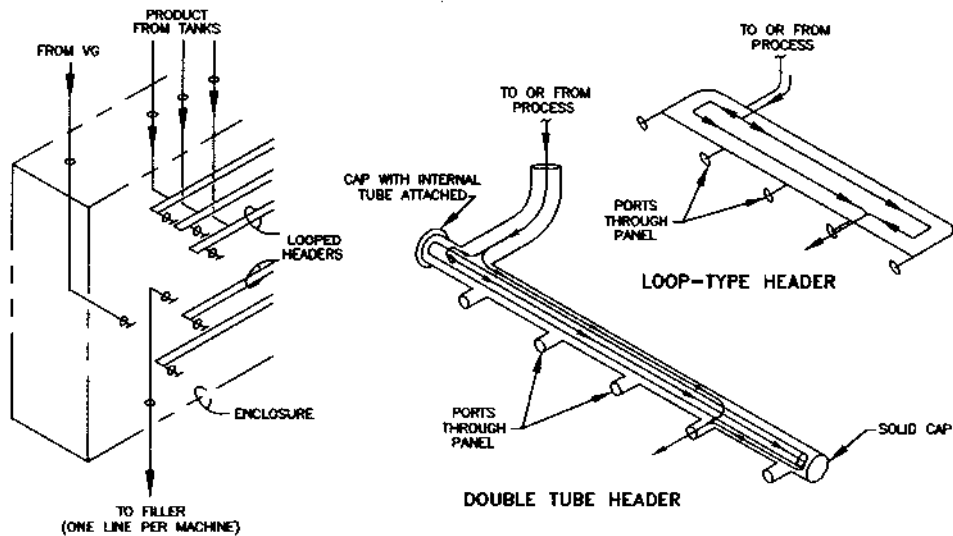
Transfer panel headers must be designed to eliminate header dead-ends. Loop-type and internal tube headers are illustrated on the right of this drawing which also shows a partial view of the internal piping of a panel similar to Figure 15.15.
